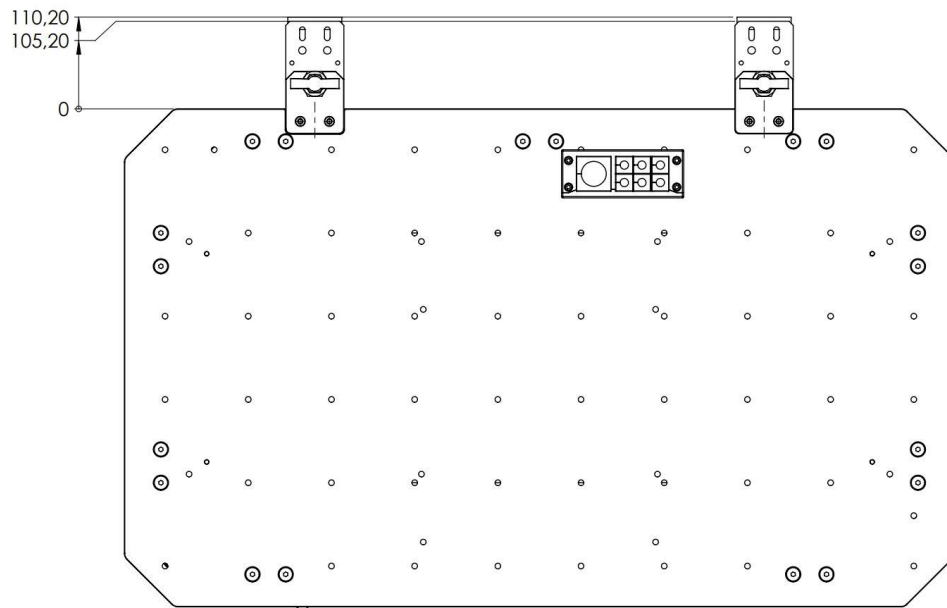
Dimensions flange plates (horizontal mounting) and machine flange (vertical mounting), valid for MRB S, M und L
